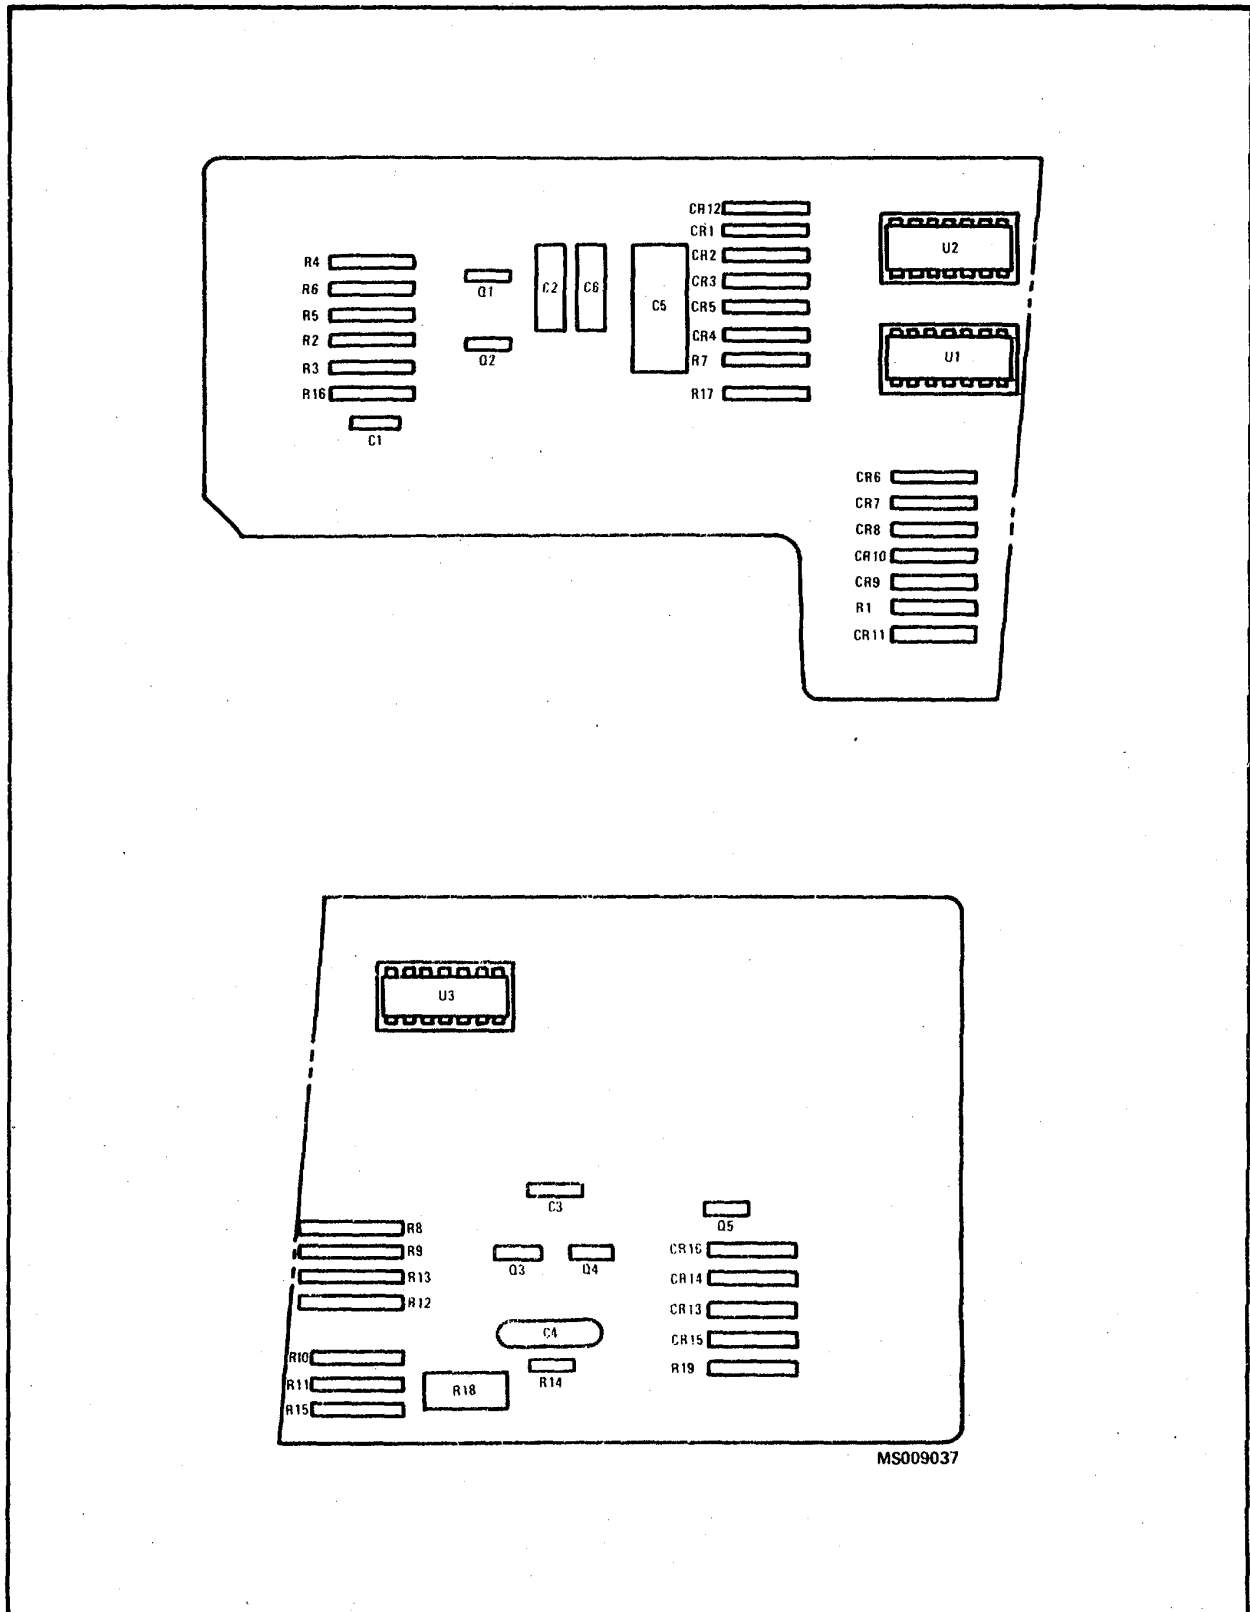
RANGE DELAY PCB ASSEMBLY
